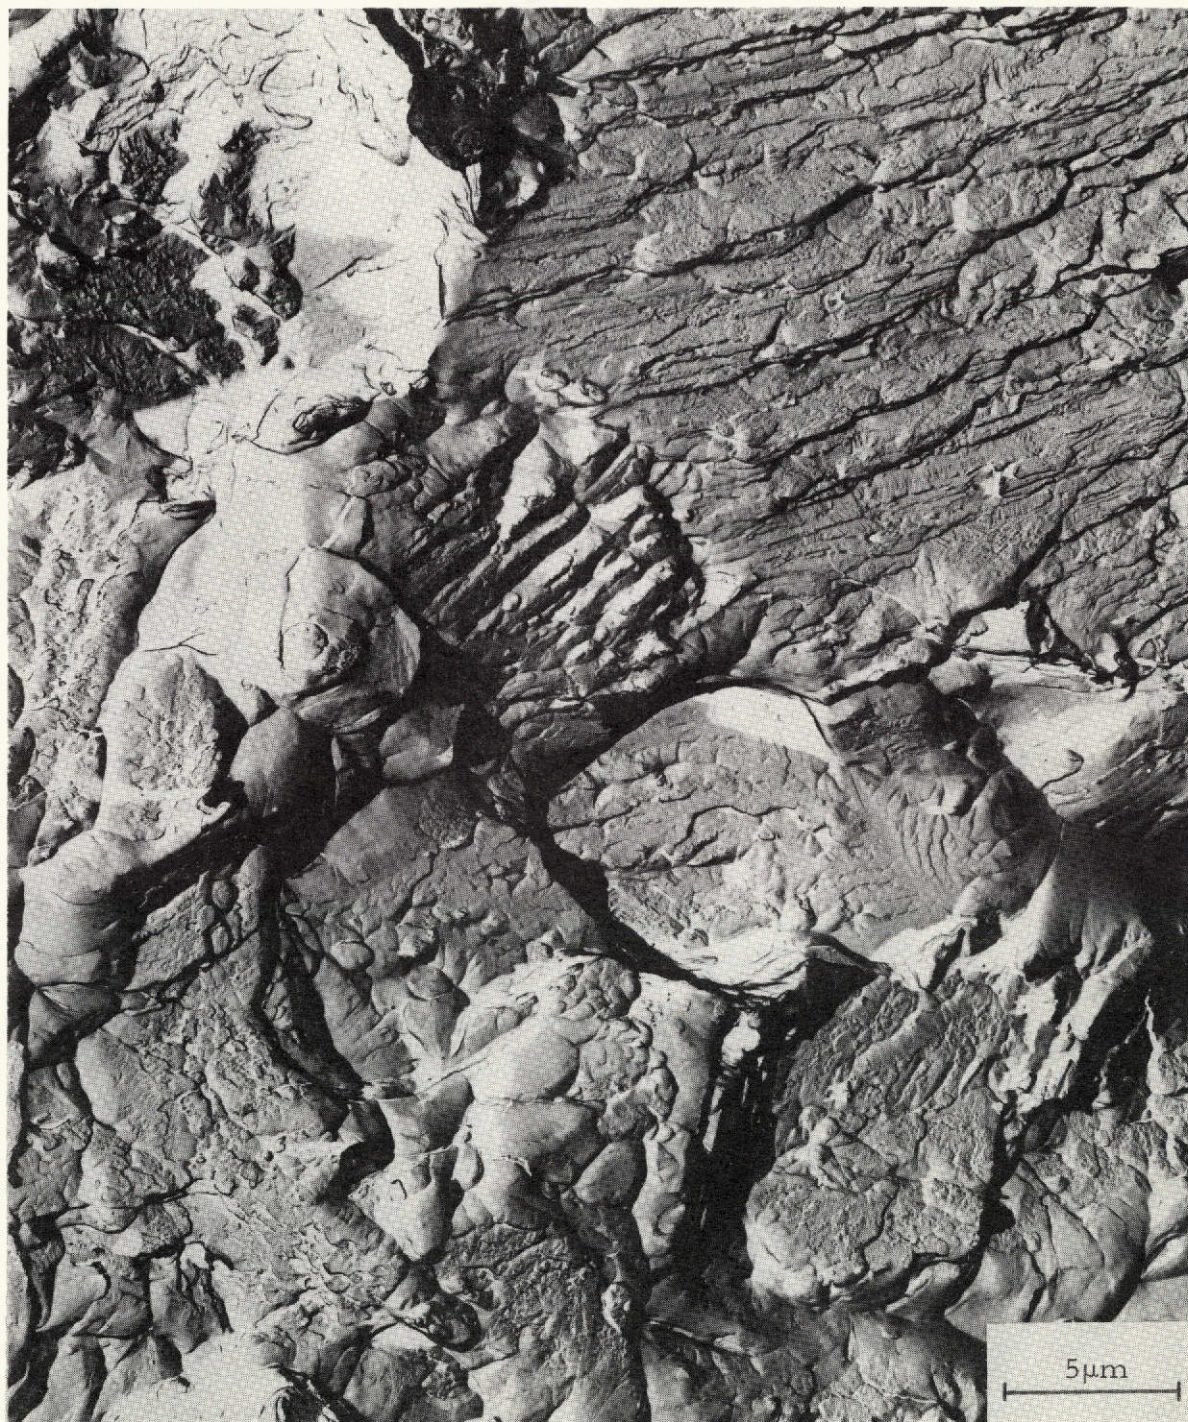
Electron fractograph from the fatigue precracked Charpy fracture of the exploratory 18 Ni maraging steel aged at 900°F (482.2°C) and tested at liquid nitrogen temperature.
